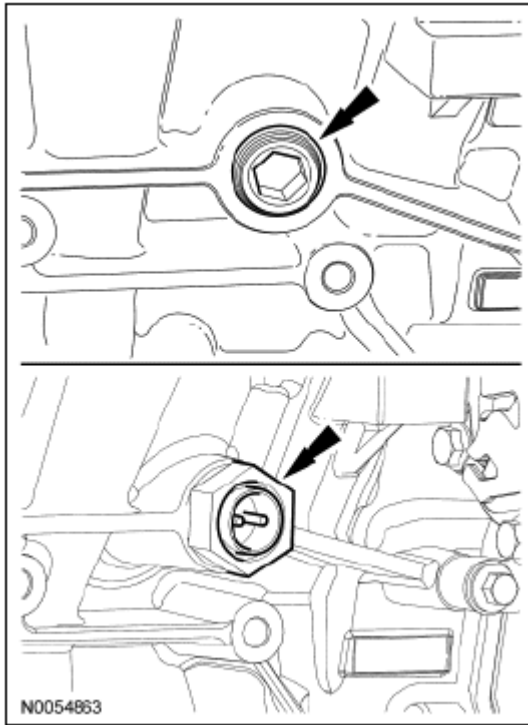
Locating RH Cylinder Block Drain Plug & Block Heater
